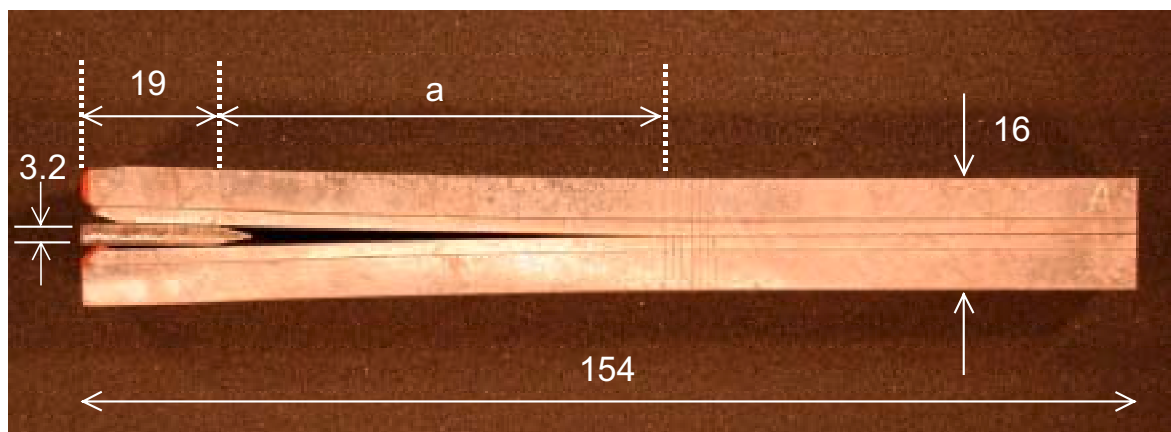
Dimensions (in mm) of RDCB specimen used in the wedge test.
